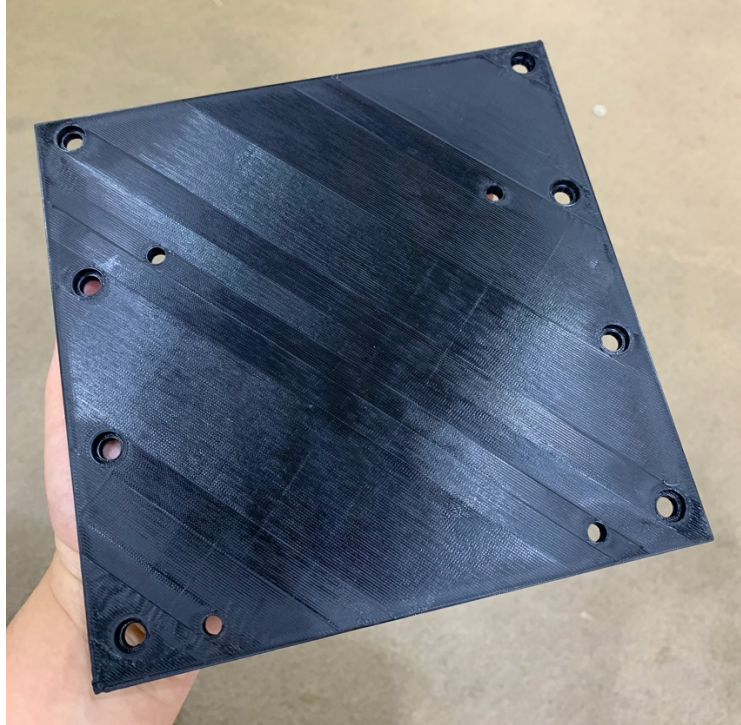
3D Printed Dexter™ Robot Mating Piece
